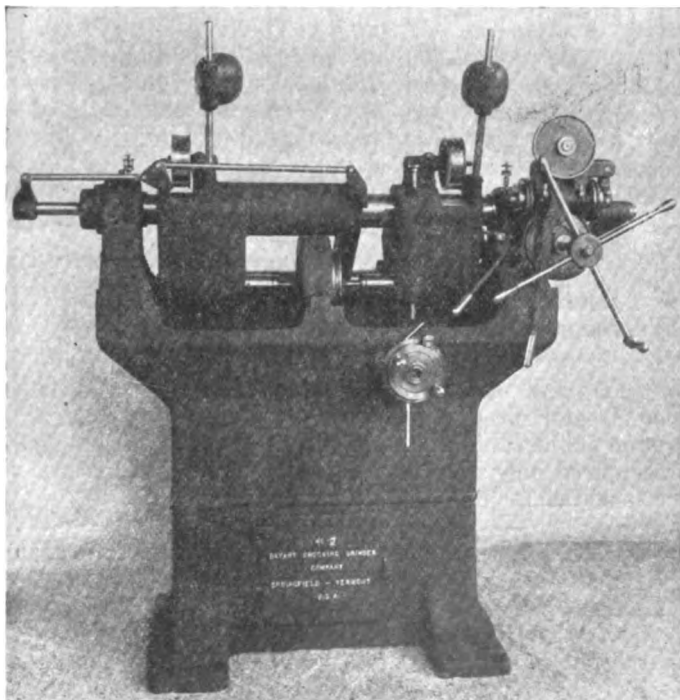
Bryant No. 2 double head grinder, for grinding wrist pin holes in pistons
